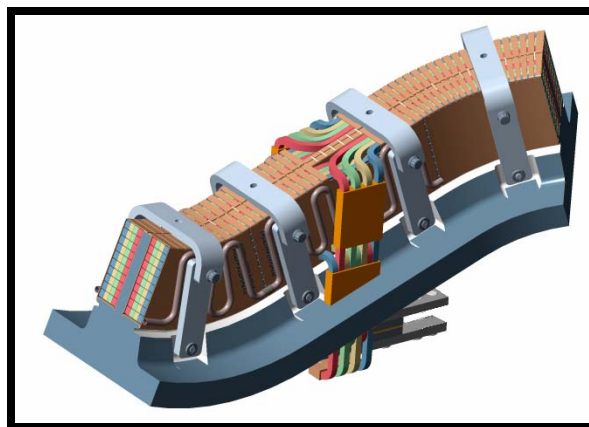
Mod Coil Schematic showing the winding cavity (tee), winding and clamps
